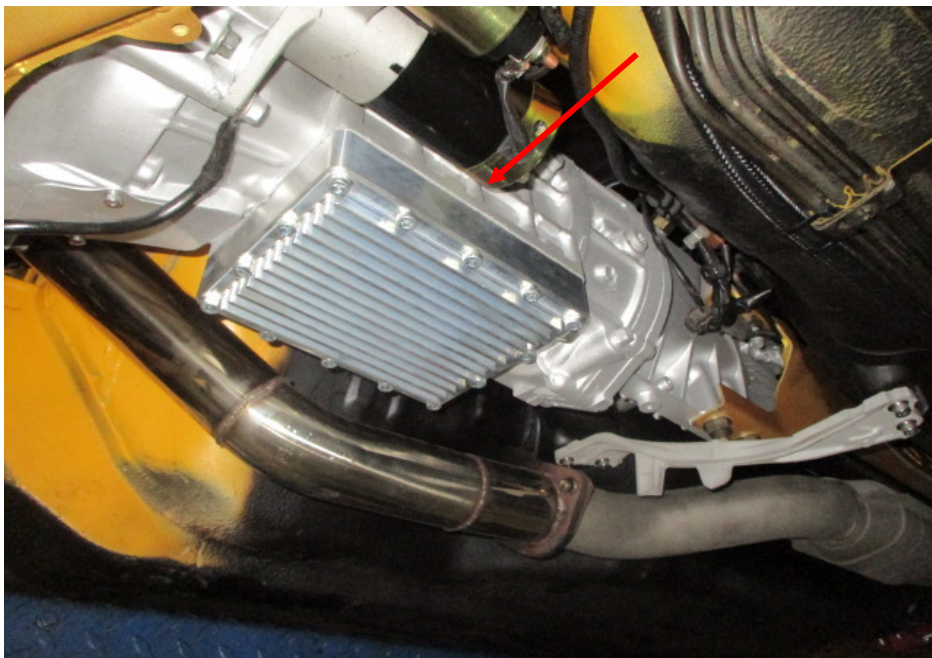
shows another view of the transmission (arrowed) that was fitted on the Motor Car, as viewed from a left to right angled perspective. The front (input) side of the transmission was observed to be bolted to the crankshaft side (torque converter) of the engine block while the rear (output) side of the transmission was connected to the propeller shaft, which links to the rear differential of the Motor Car, providing the drive to the rear wheels. There was no visible crack(s) and/or hole observed on the transmission housing.
